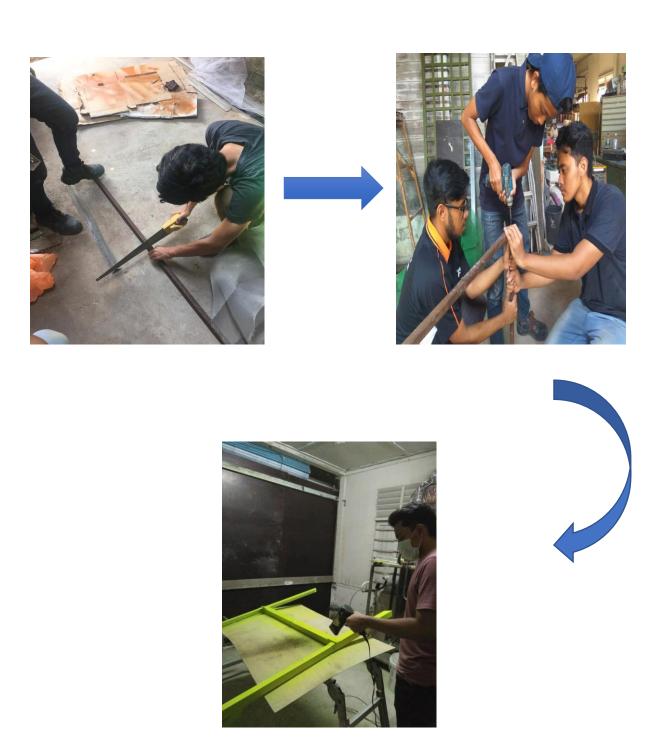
vi: Cut the wood, drill the hole and painting the panel frame.
